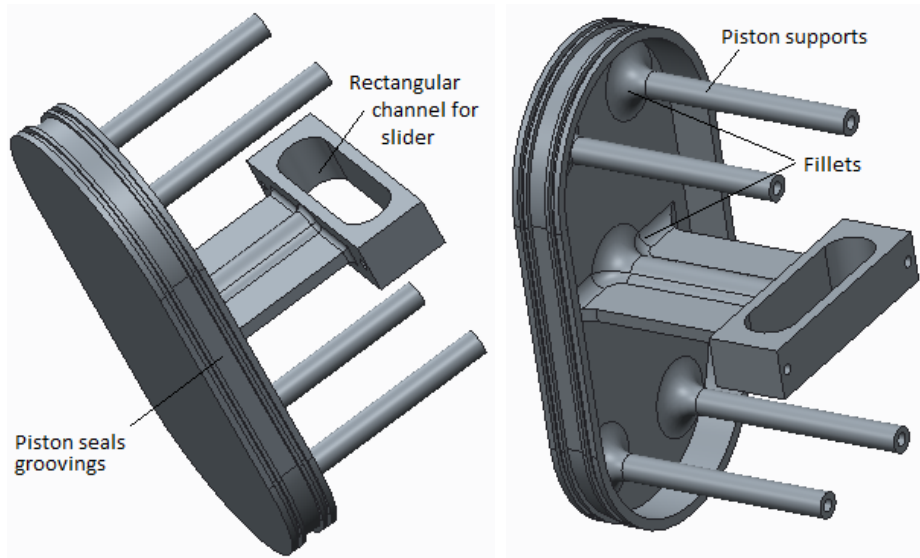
Oval piston design with rectangular channel for slider (left), piston back view showing fillets at piston supports and middle web (right).
